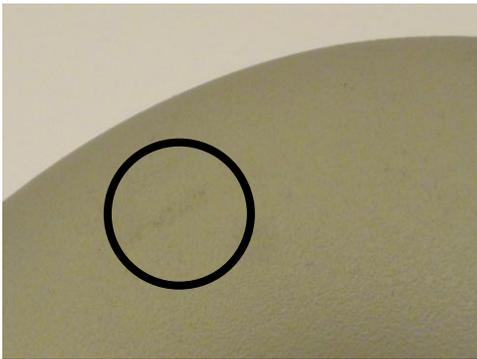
Ultrasonic welding with an aluminum horn can leave residue on the part.
